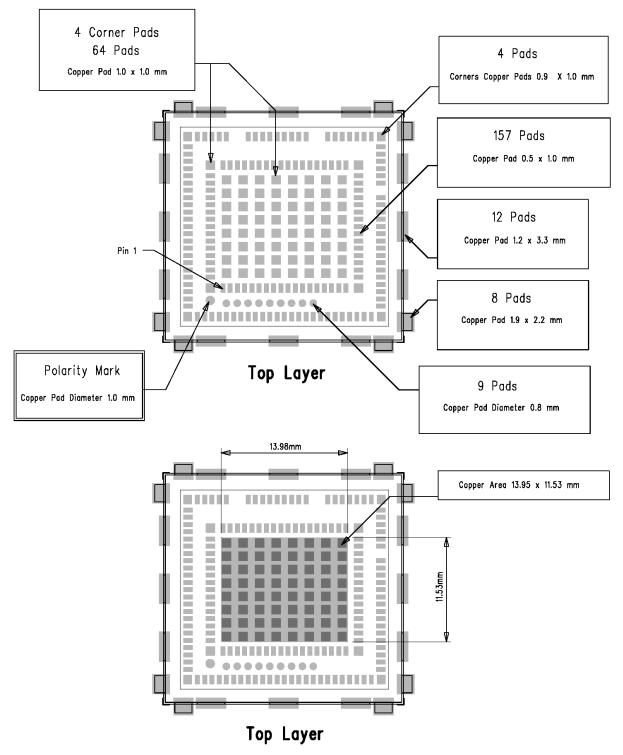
Recommended WP and RC76 Series Snap-in Socket Footprint - Copper Layout
